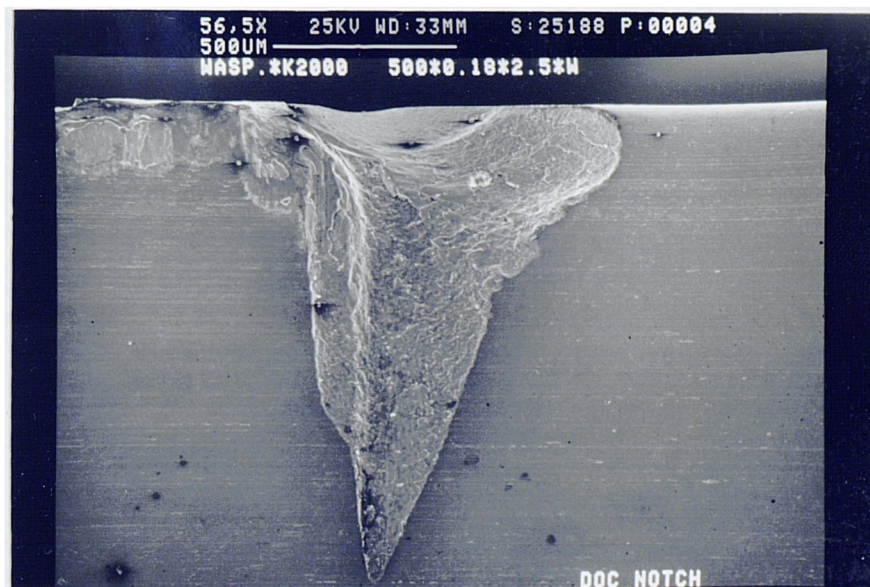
End of DOC notch on Kyon 2000 tool after wet machining of Waspaloy (V=150m/min, DOC=2.5mm, F=0.18mm/rev)
